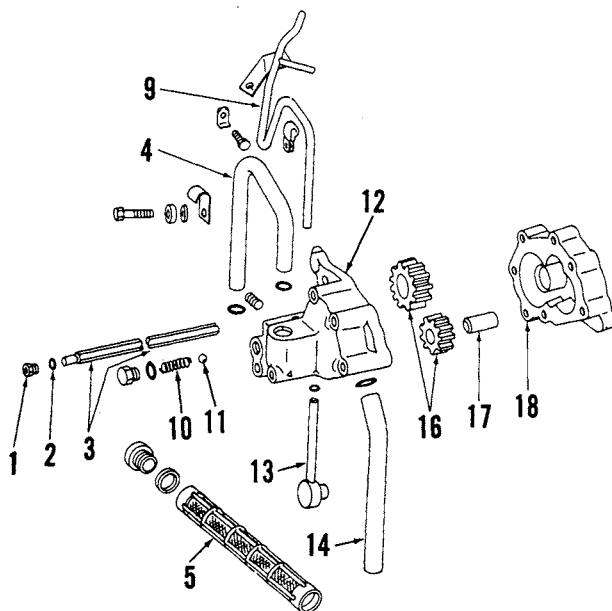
A—Exploded view of Quad-Range transmission oil pump used on 4650 tractors. Refer to Fig. 130 for legend.
